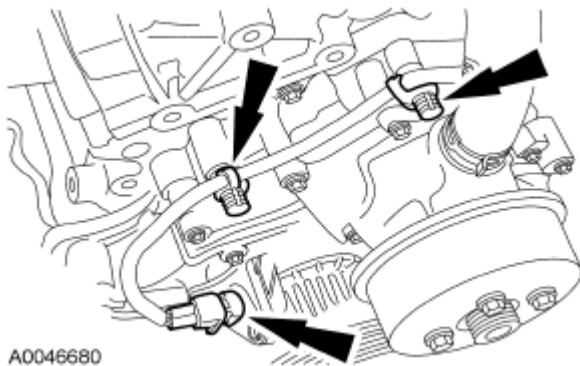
Locating Crankshaft Position Sensor Electrical Connector And Wiring Anchors
